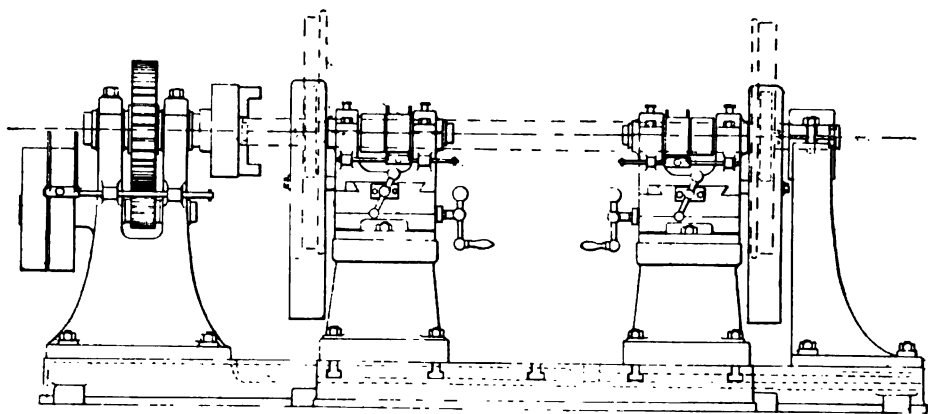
TRAMWAY WHEEL GRINDING MACHINE MADE BY MESSRS. POLLOCK & MACNAB, LTD.,
